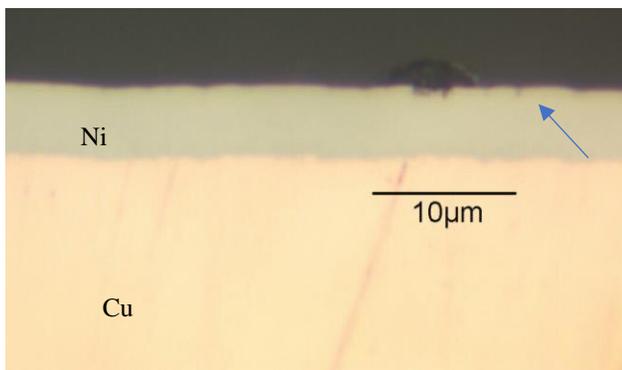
Cross-section of solder pad affected with blackpad. The Ni₃P layer is less than a micrometre thick and shows cracks.
